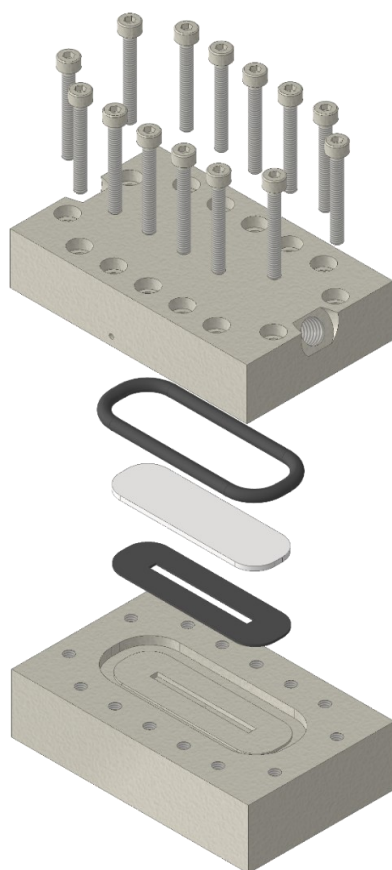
Exploded assembly of the crossflow filter used in the slurry loop membrane reactor.
